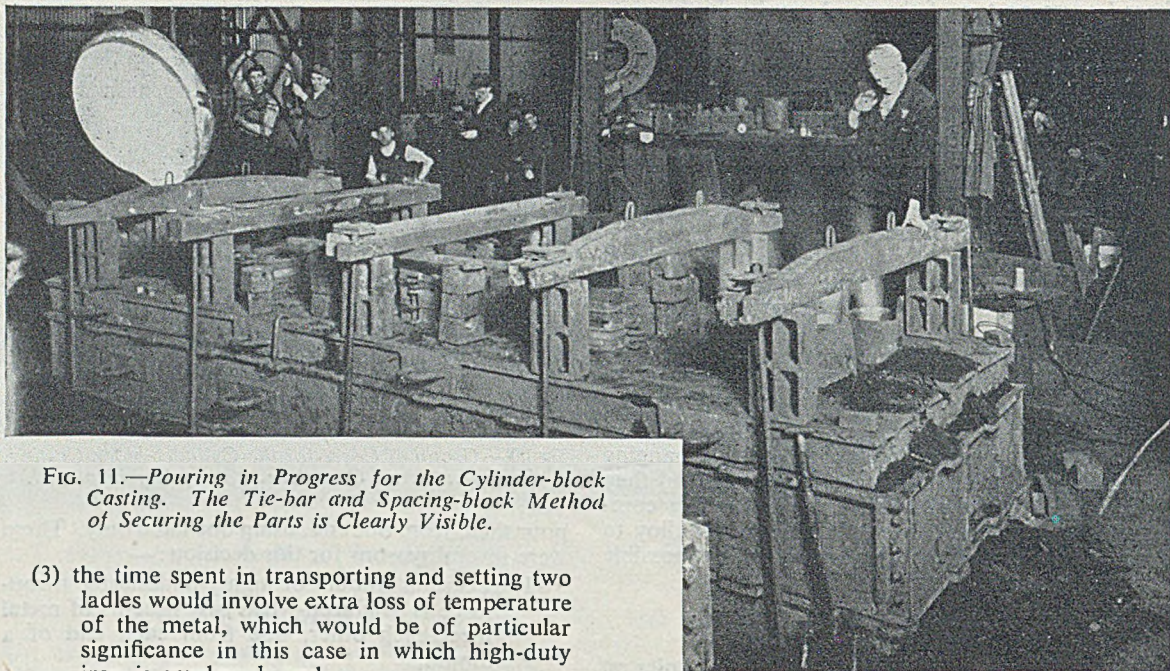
Pouring in Progress for the Cylinder-block Casting. The Tie-bar and Spacing-block Method of Securing the Parts is Clearly Visible.
